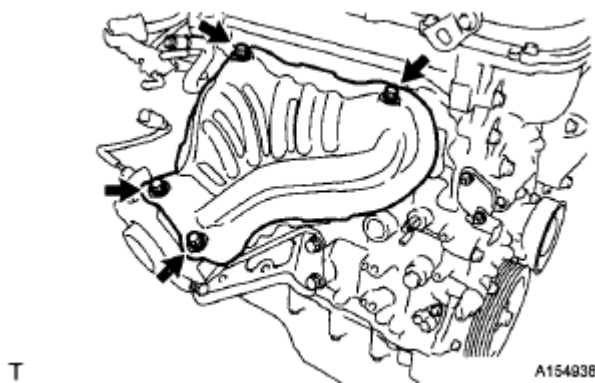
Locating No. 1 Exhaust Manifold Heat Insulator Bolts
